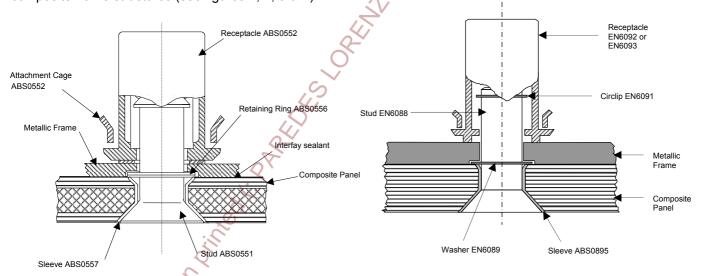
Example of final assembly – 2 - or 4 - start quick release fastener system (composite panels with acres sleeves)
